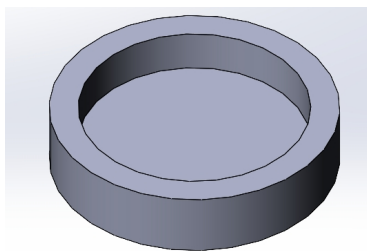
Bottom magnet housing (to secure the sensor on the heater surface and not via insertion to one of the chip holders).
